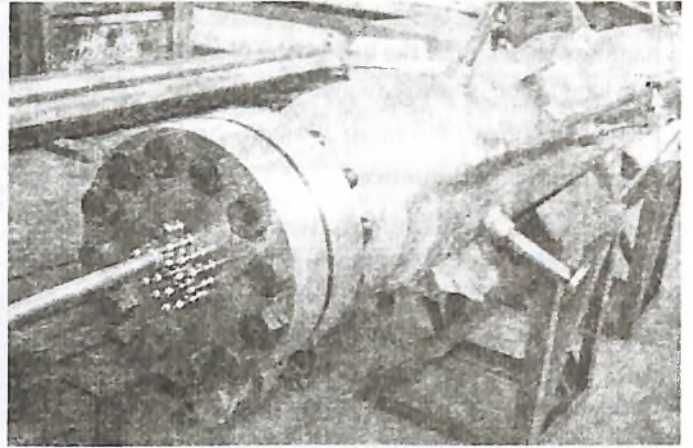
All the eight Heater Pins are welded with Tube Sheet
